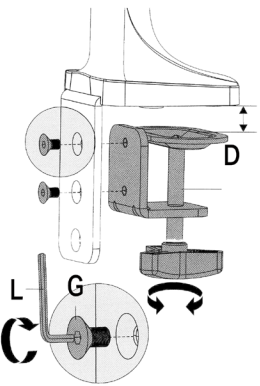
Attach clamp mechanism D to angled bracket C.
